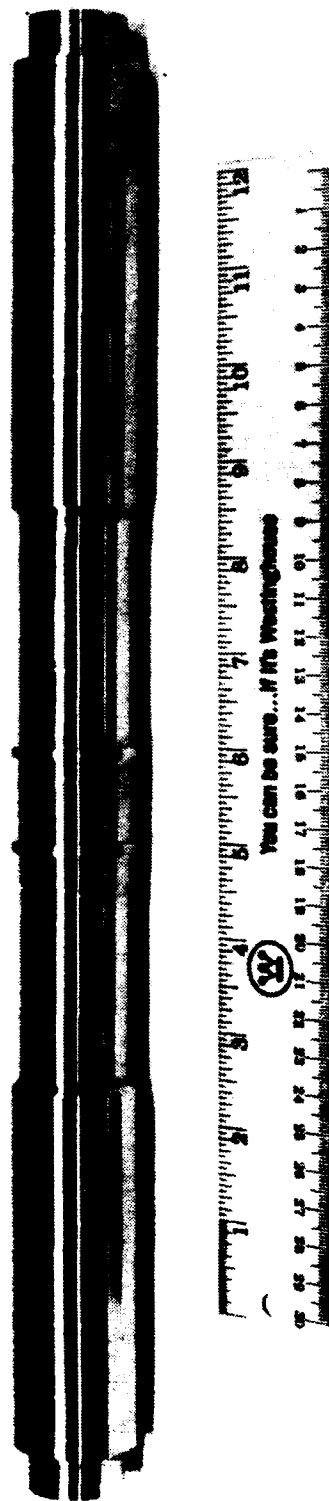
Tube No. 1 HIP Package, Partially Machined.
